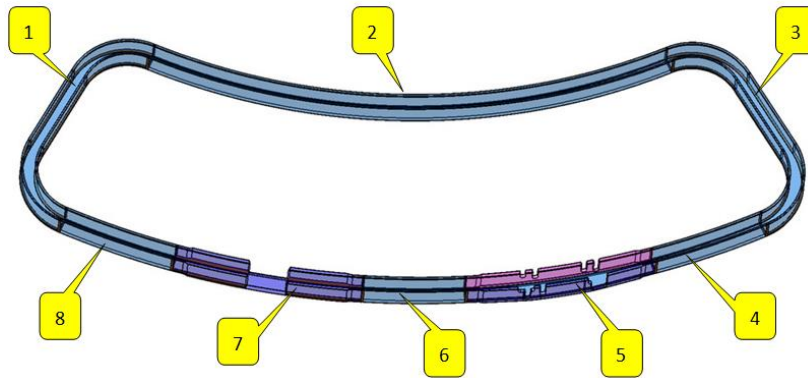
Overview of detailed segment machining of a U-shaped case
